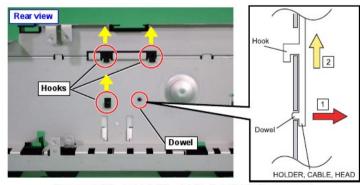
HOLDER, CABLE, HEAD Removal 2
